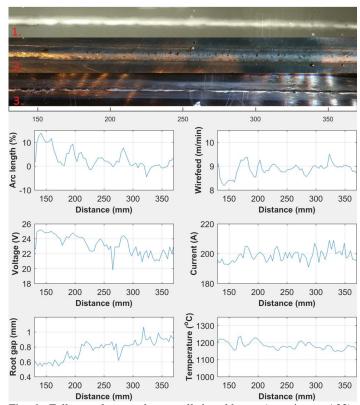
Full neural network controlled weld test (experiment A22), welding parameters plotted over the weld. Distance being the length of the welded seam starting from arc ignition. On the top is the X-ray image of the weld (1.), in the middle top side of the weld (2.) and in the bottom, is the back side of the weld (3.). Weld profile is cut to fit the scale in the measurements.
